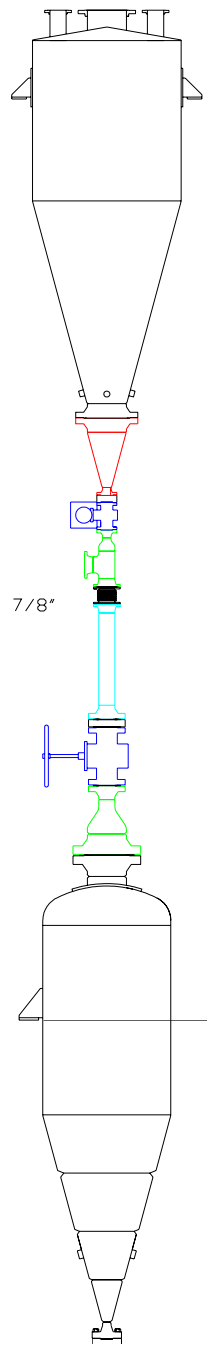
Pressurization Hopper/Tank Assembly (Drawing 7R109703)
